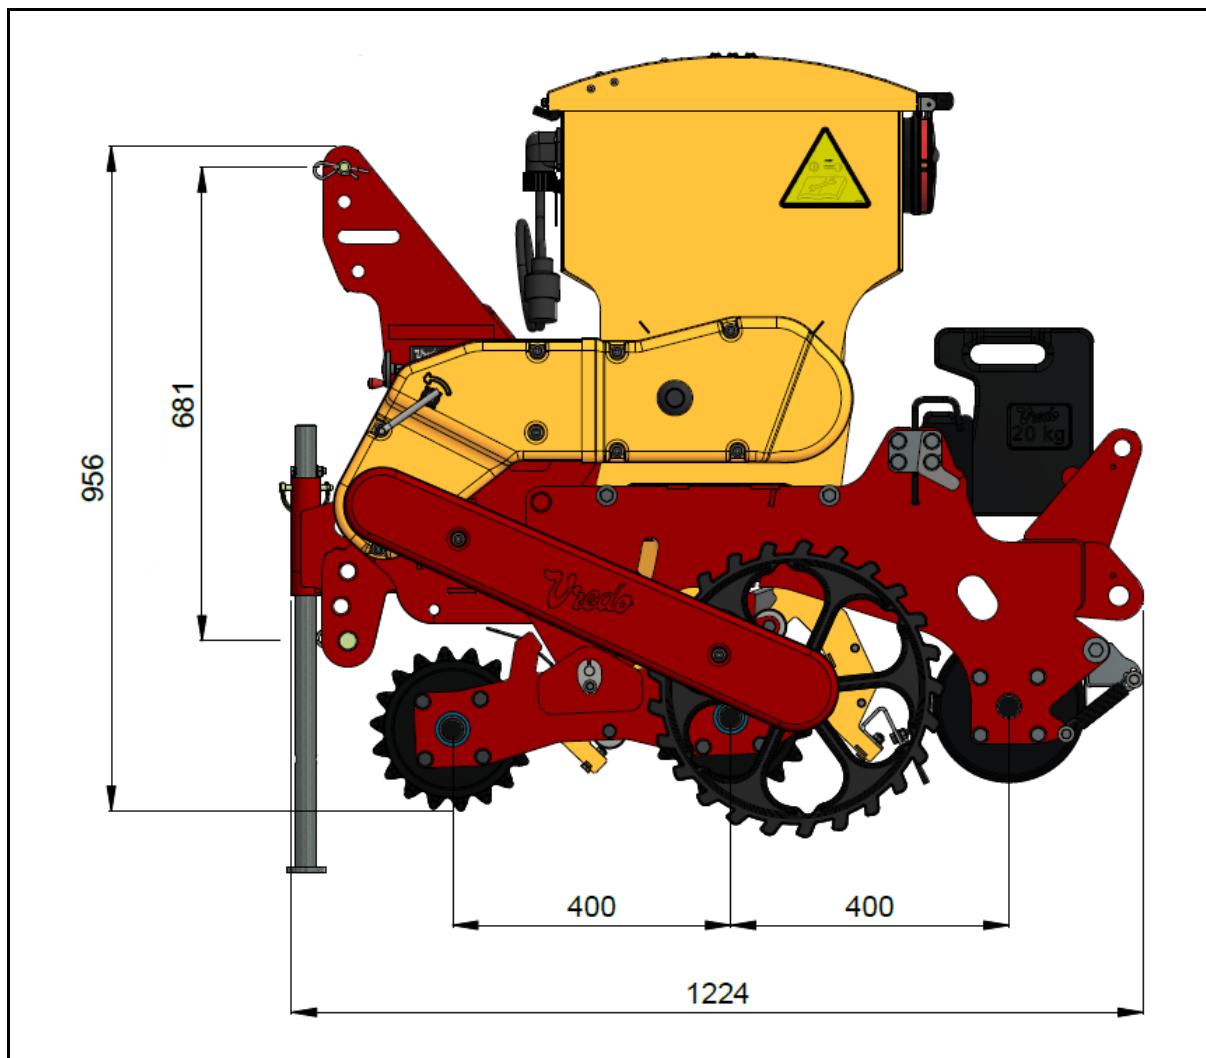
Dimensions of DZ5 Stitch compact, side view
